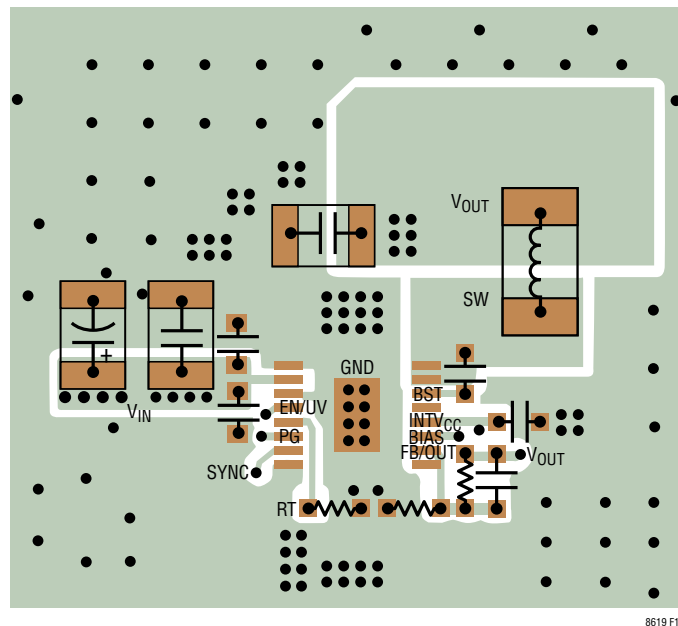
Recommended PCB Layout for LT8619 16-Pin MSOP
